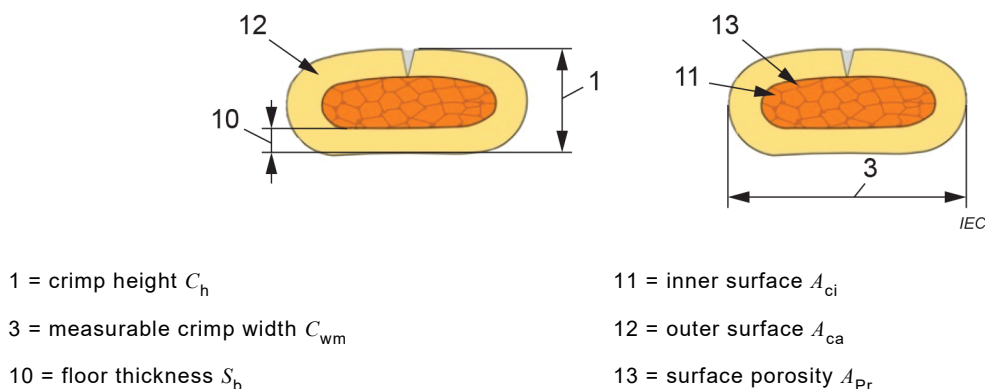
Dimensions on the microsection for crimp barrels (also pre-insulated)
